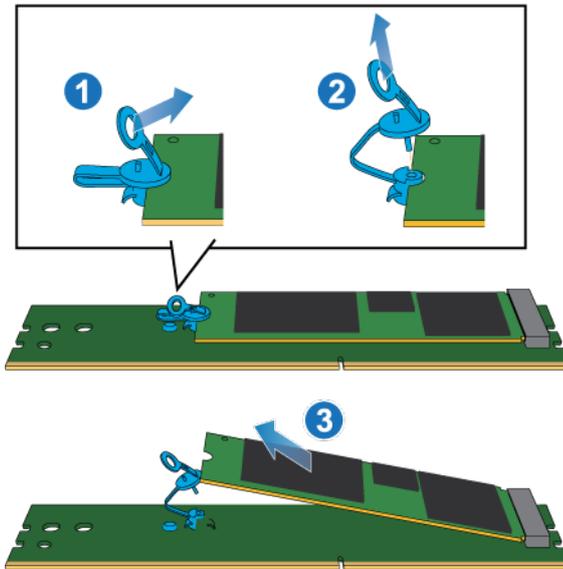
Removing the internal M.2 boot modules from the M.2 boot module adaptor
